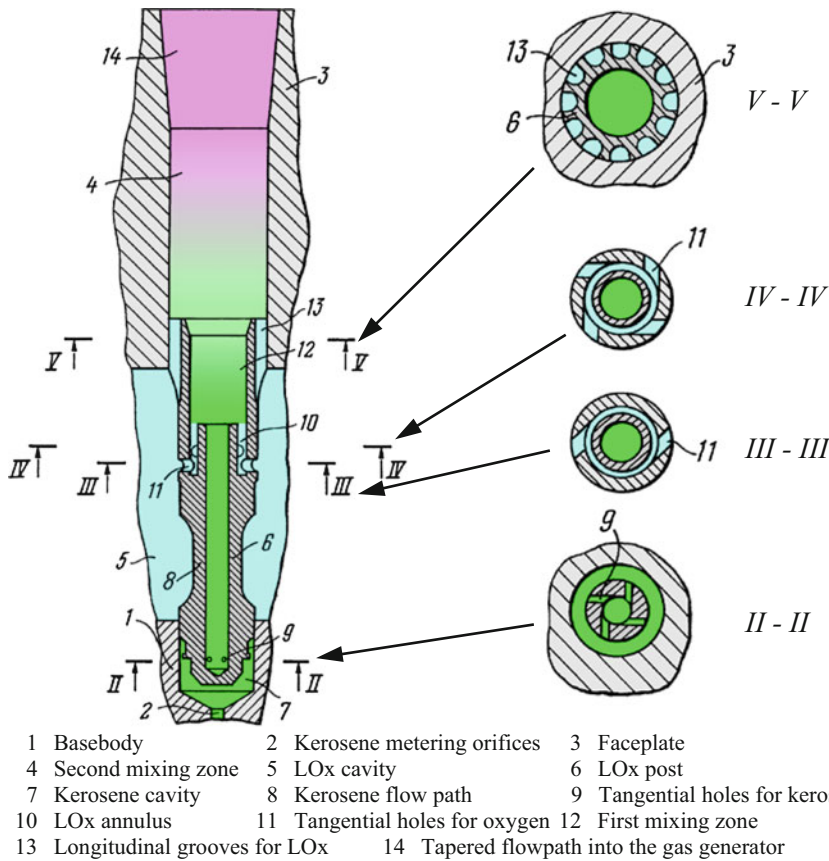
Ox-rich injection element of the gas generator of RD-170 engine (Based on [14])
